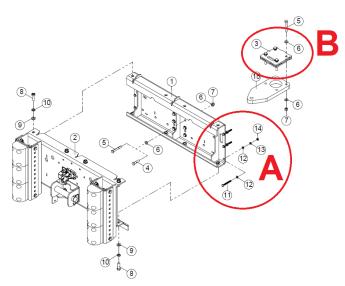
Extra Parts Provided Key A – Side Mounting METRIC Bolts Key B – Hitch Spacer Plate Refer to text at left for more information.
